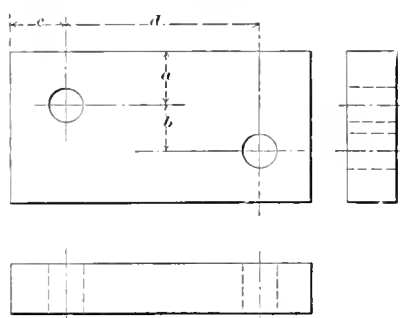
Simplest Form of Jig for Piece shown in Fig. 61.
